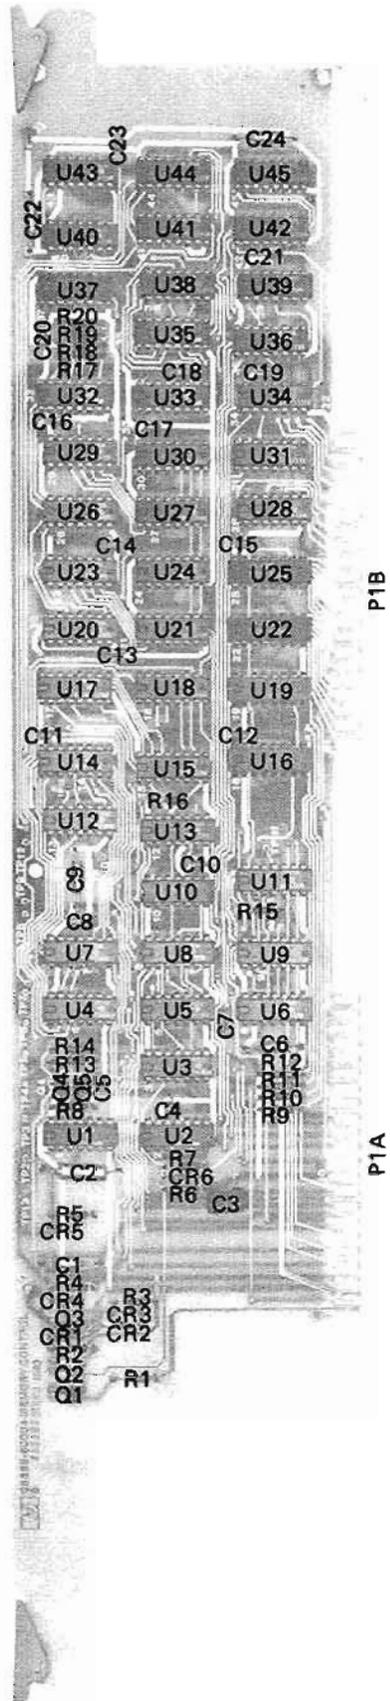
A1 HP-IB Input Assembly and A3 HP-IB Control Assembly
